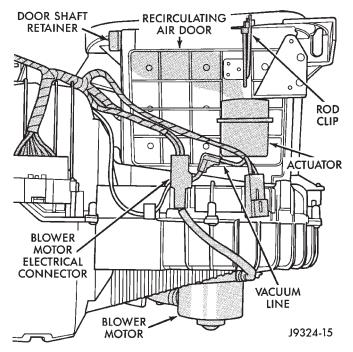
Recirculation Air Door Vacuum Actuator Remove/Install
